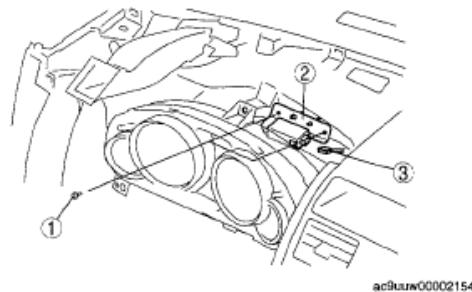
Identifying Keyless Receiver, Connector & Screw
